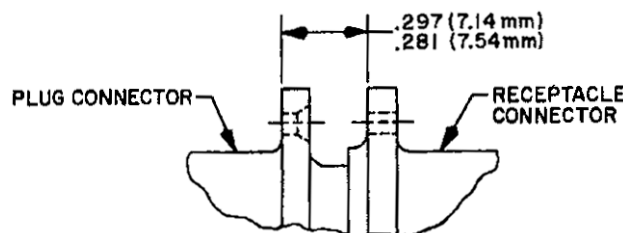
DEFINITION OF A MATED CONNECTOR
